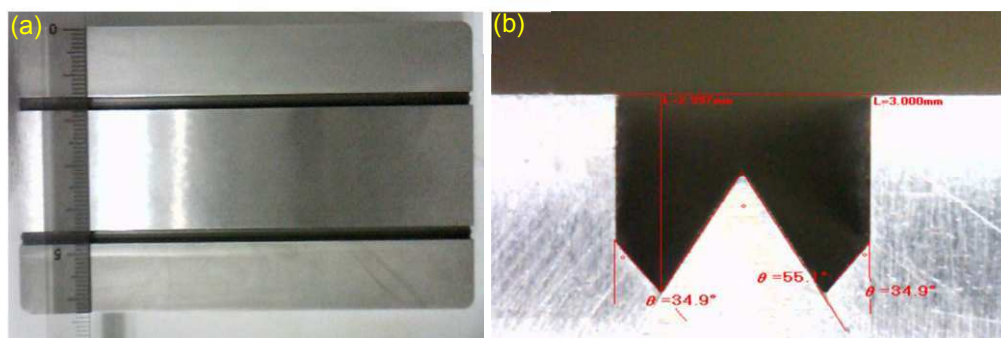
Photographs of the LGC mold viewed from top (a) and in cross-section (b).
